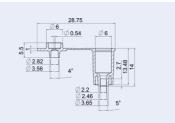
Detail drawing of tank Fluidic 934 with Luer interface
